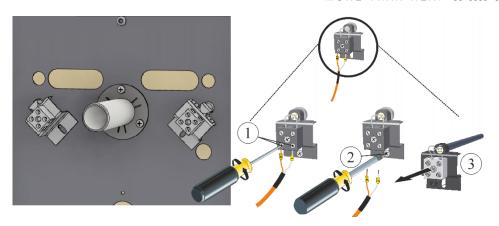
Dismantling the thermocouple(s) for the furnace chamber (similar to picture)
